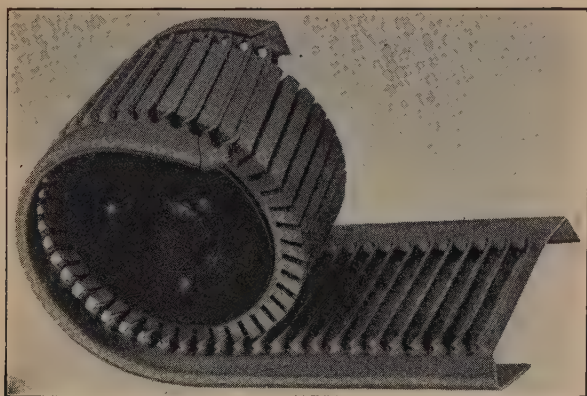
Developed one-piece rotor winding for squirrel-cage motor.
